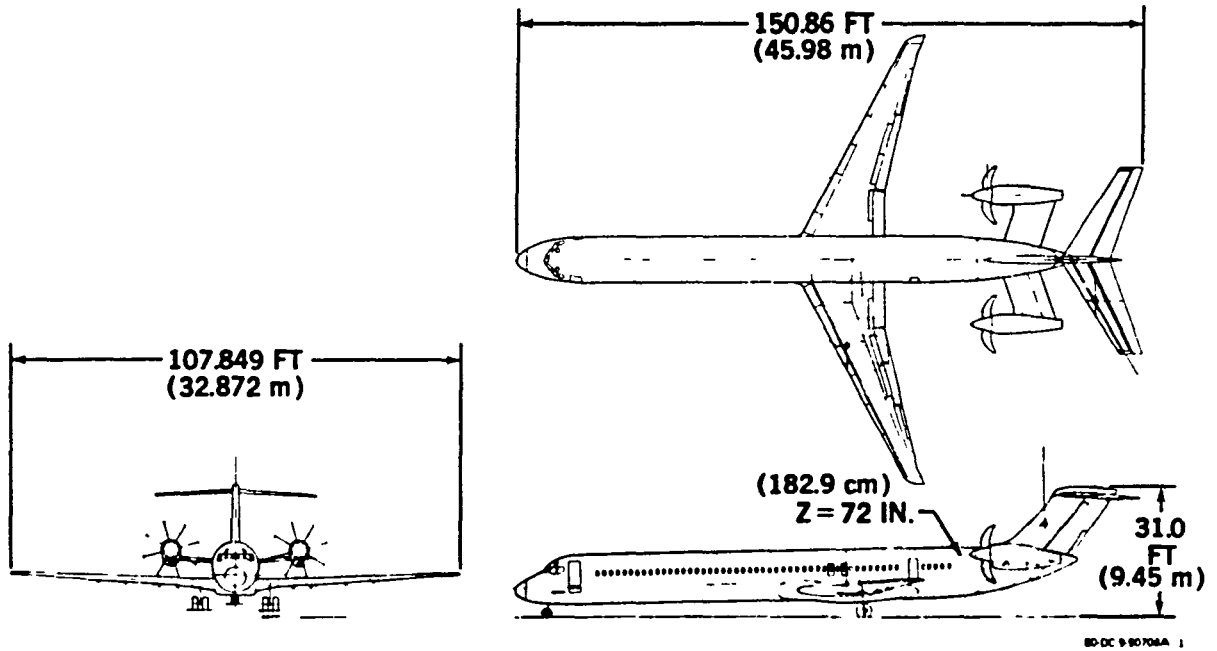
GENERAL ARRANGEMENT – AFT FUSELAGE PYLON-MOUNTED PROPFAN, CONFIGURATION 2
